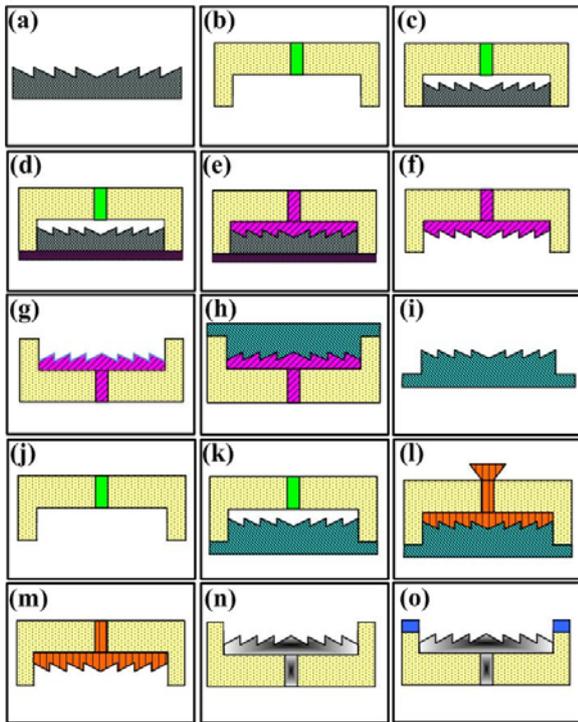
Schematic illustration of process flow for fabricating a precision epoxy resin mold: a – master model; b – machining the groove and sprue of mold plate; c – placing the master model in the groove; d – pouring the silicone rubber over the master model; e – first silicone rubber mold; f – placing the first silicone rubber mold upside down in the groove; g – spraying the release agent; h – pouring silicone rubber over the first silicone rubber mold; i – second silicone rubber mold; j – cleaning the mold plate; k – placing the second silicone rubber mold in the groove; l – pouring the epoxy resin composites over the second silicone rubber mold; m – epoxy resin mold; n – post curing of epoxy resin mold; o – machining the slot of epoxy resin mold
